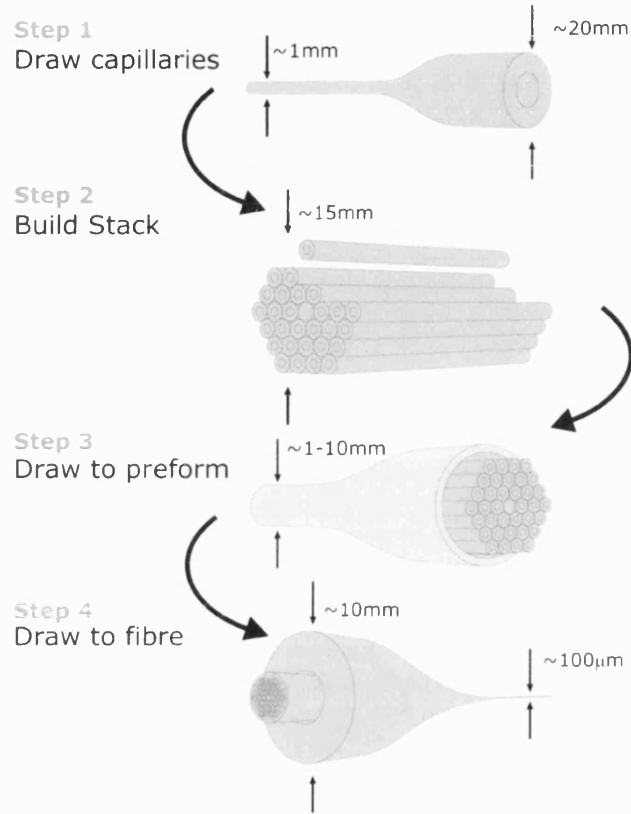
Stack-and-draw technique to fabricate PCF.
